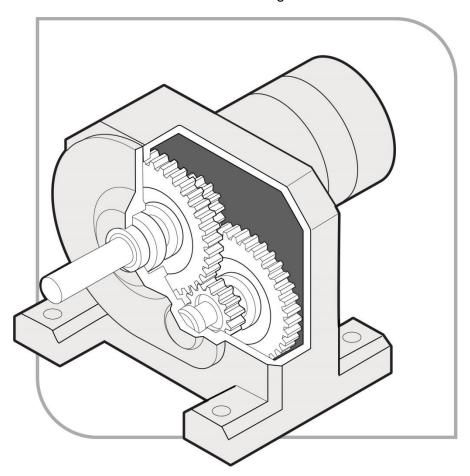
Cut-away view of a fixed physical barrier encasing the gear assembly and electric motor
